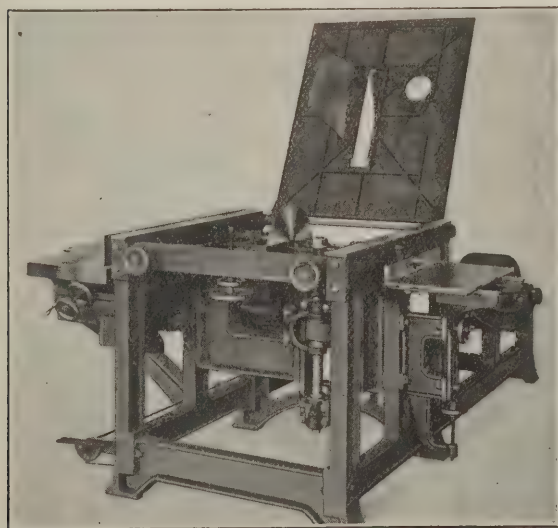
Machine with Table Raised, Exposing Saw Mandrel.
